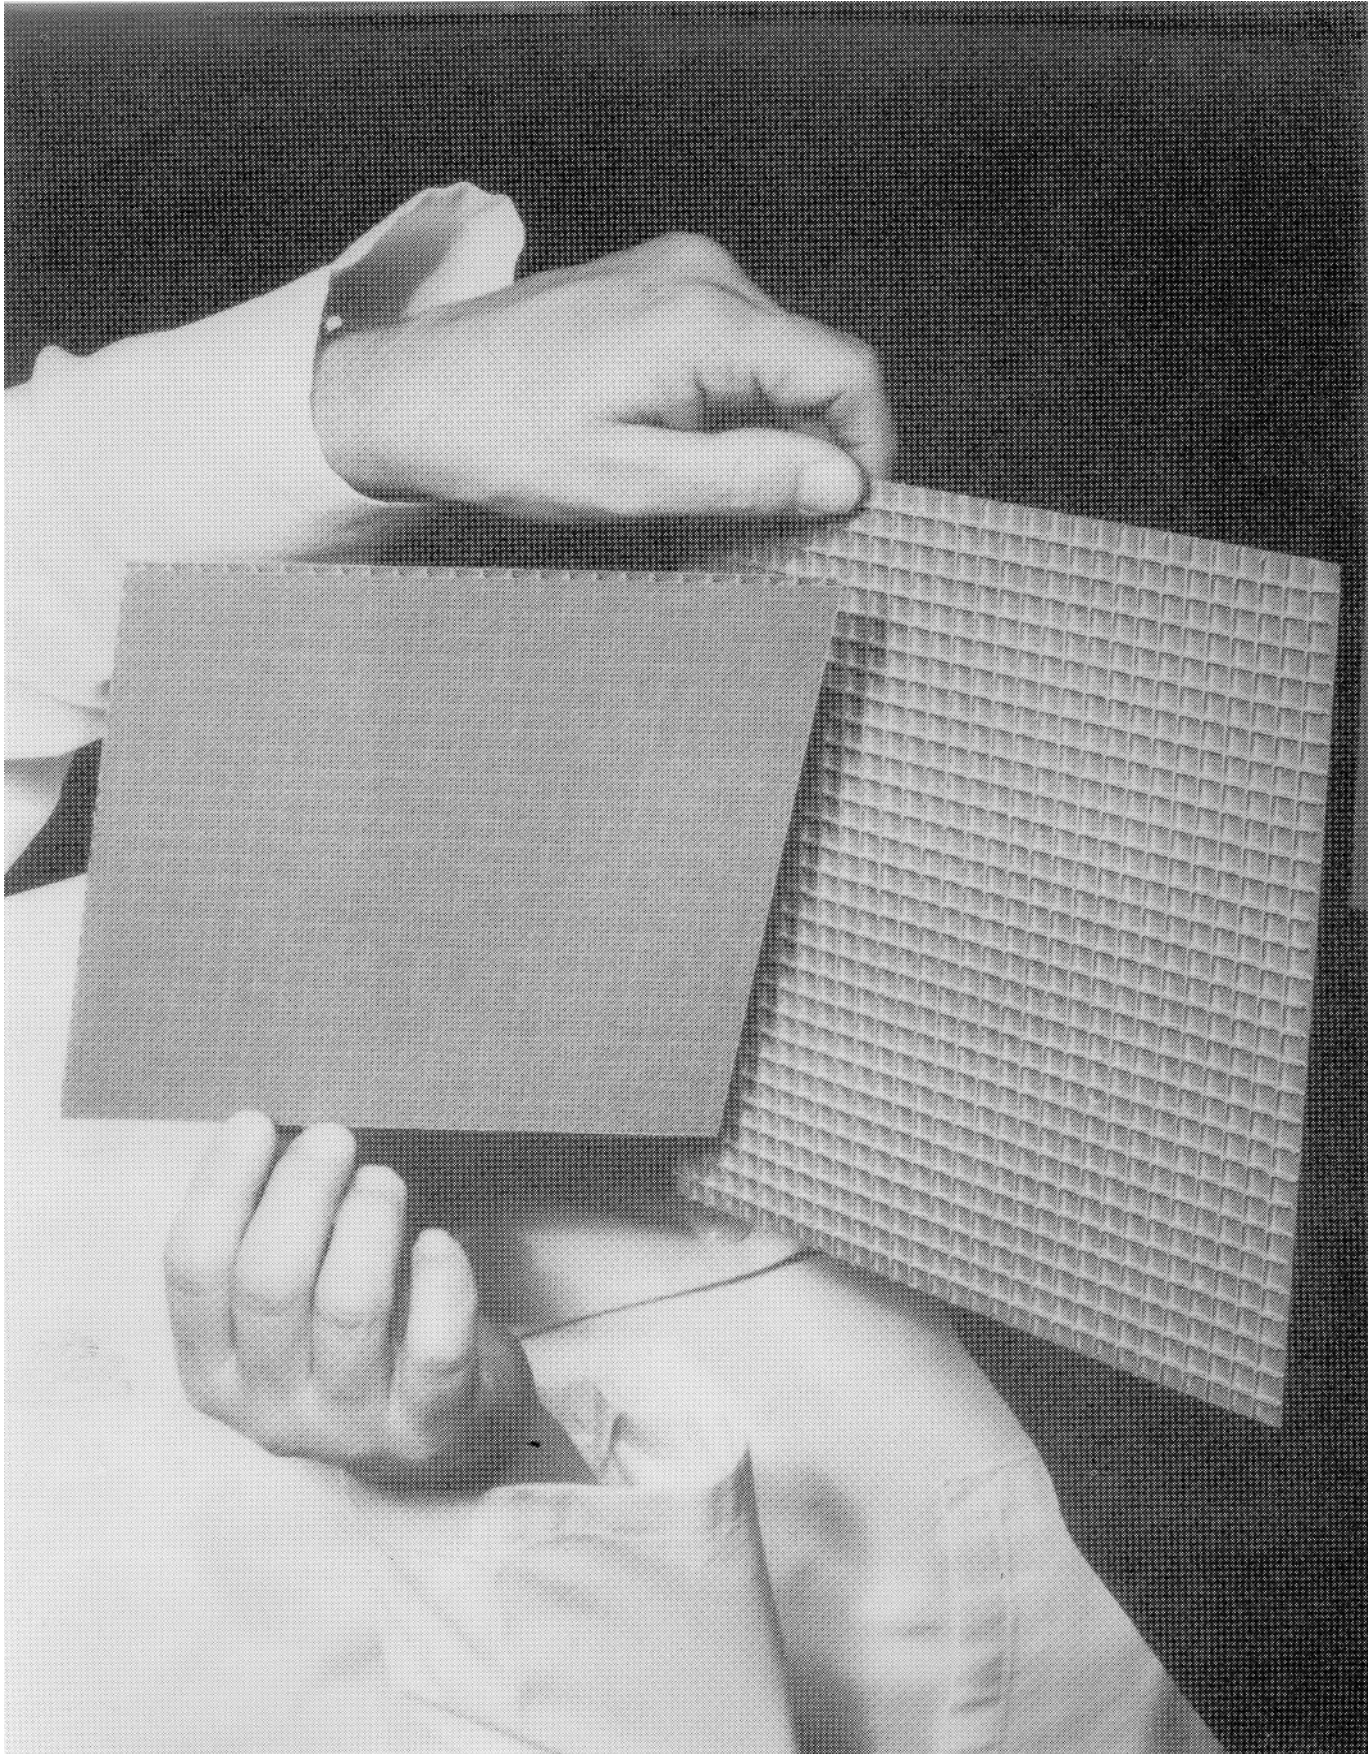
The Spaceboard pulp-molding process is used to form a waffle-like, open-cell board. Two boards are bonded rib-to-rib to produce a closed-cell panel. The panel shown has properties similar to that of C-flute corrugated board.
